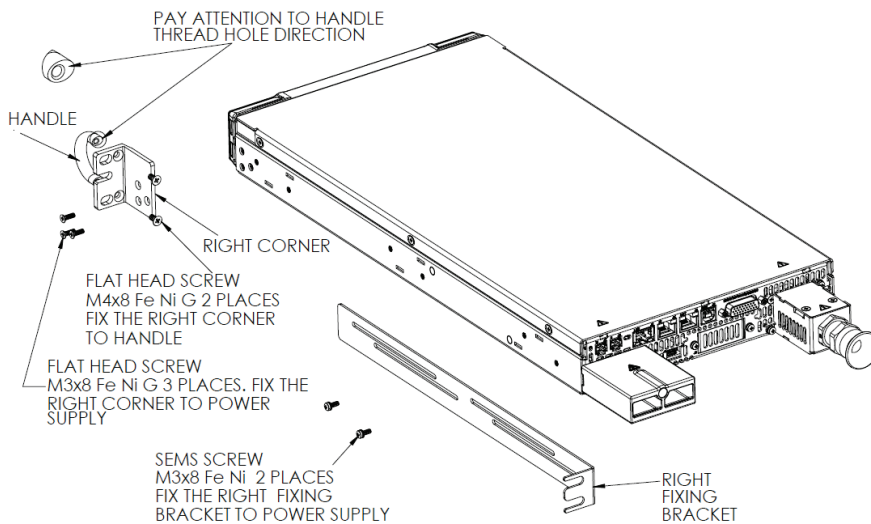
Right Corner and Fixing Bracket Assembly to Power Supply
